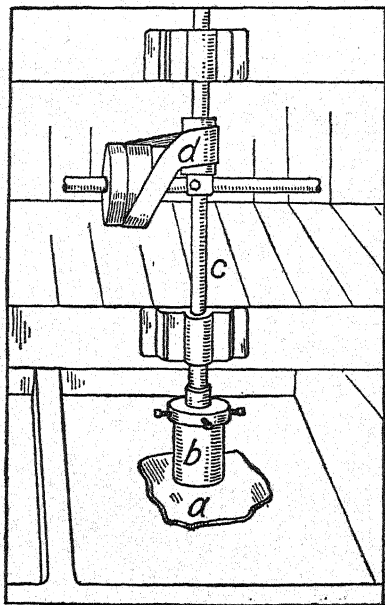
Cutting out circular grinding wheels. *a*. Natural rock. *b*. Die. *c*. Spindle. *d*. Driving belt.
